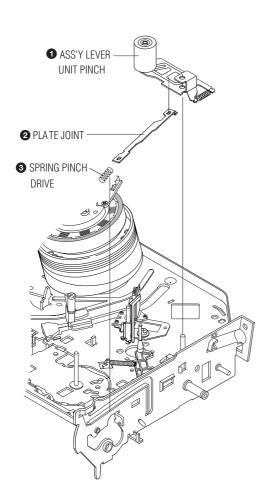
Ass'y Lever Unit Pinch, Plate Joint, Spring Pinch Drive Removal
